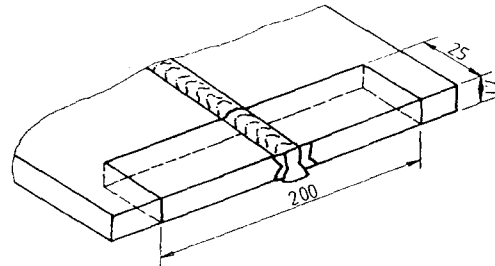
Welding plate configuration and extraction of specimen(mm)
